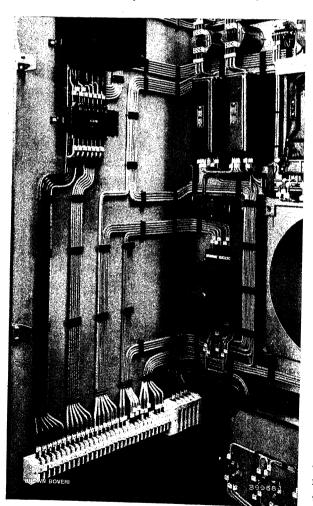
Pallivasal Power Station. Main switchboard. Details of wiring layout at the back of a generator panel.
